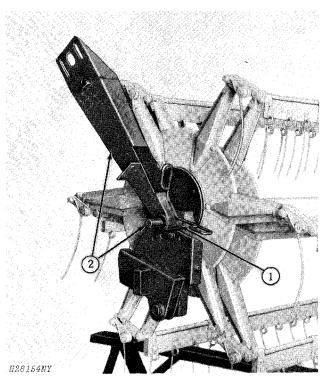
Installing Right-Hand Reel Mounting (Pickup Reel Illustrated)
